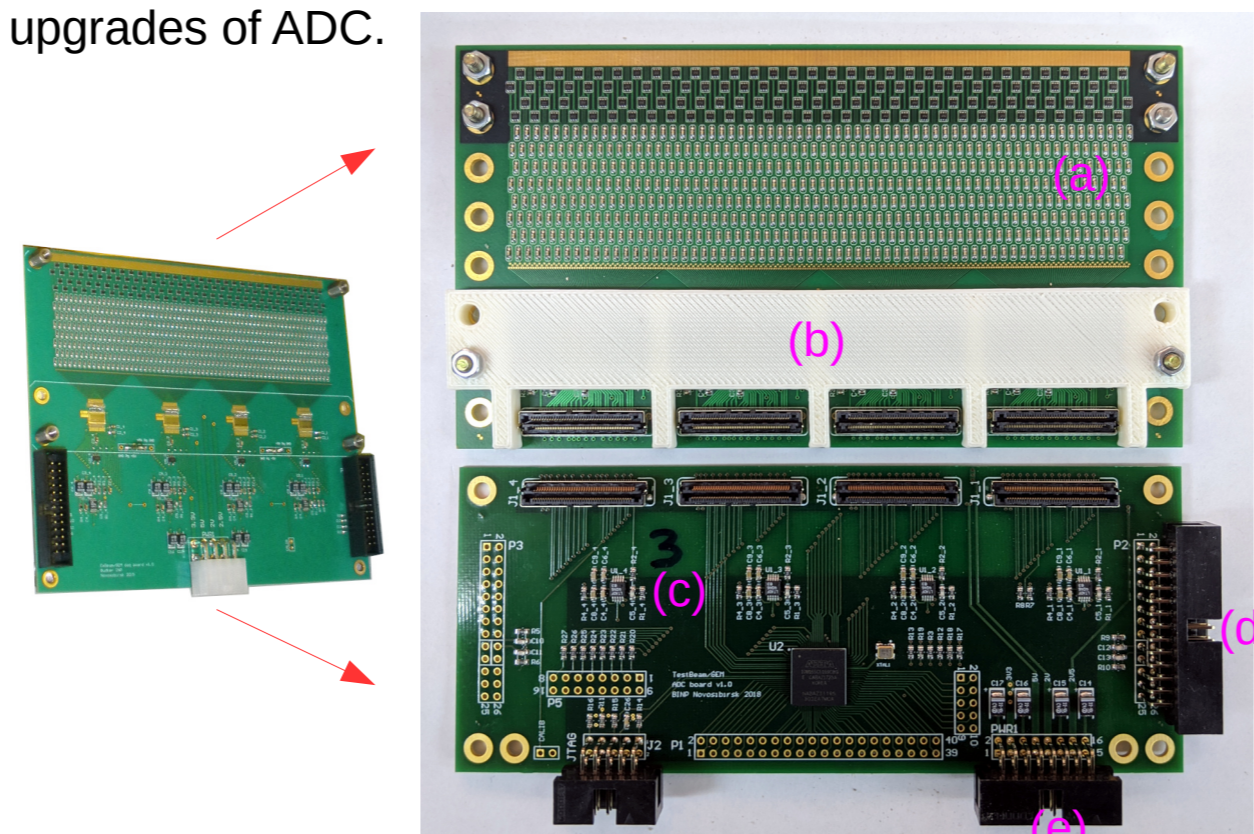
DAQ board split into Front-End board and ADC board. DAQ board elements: (a) ESD protection circuits, (b) APC128 ASICs, (c) 14bit ADC, (d) motherboard interface connector, (e) power connector (+3.3/+5.0/+2.0/+2.5V/GND)
